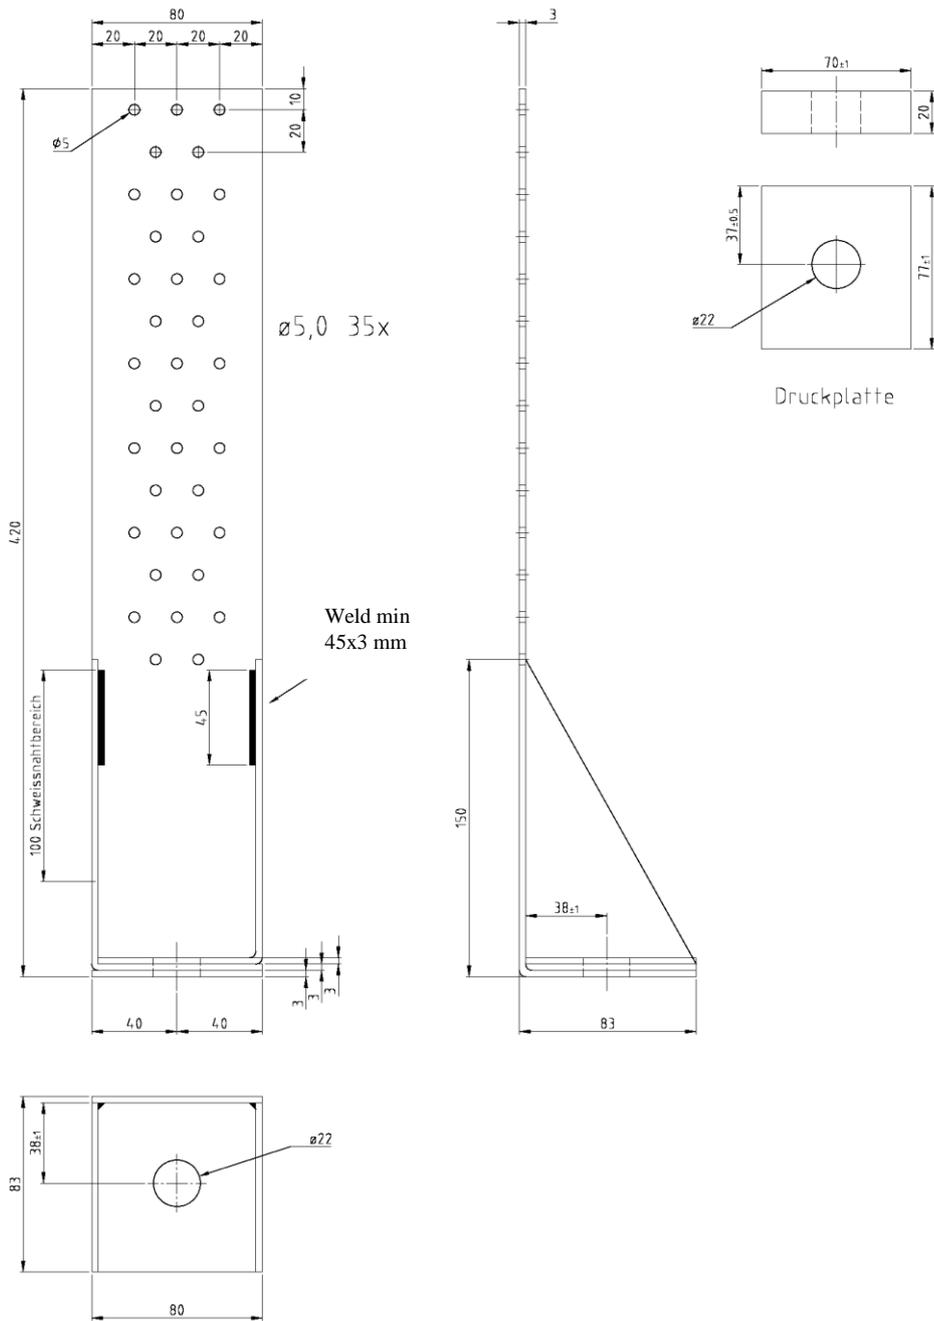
Dimensions of type GH HT30 80/420 (drawing with washer 77x70x20)
